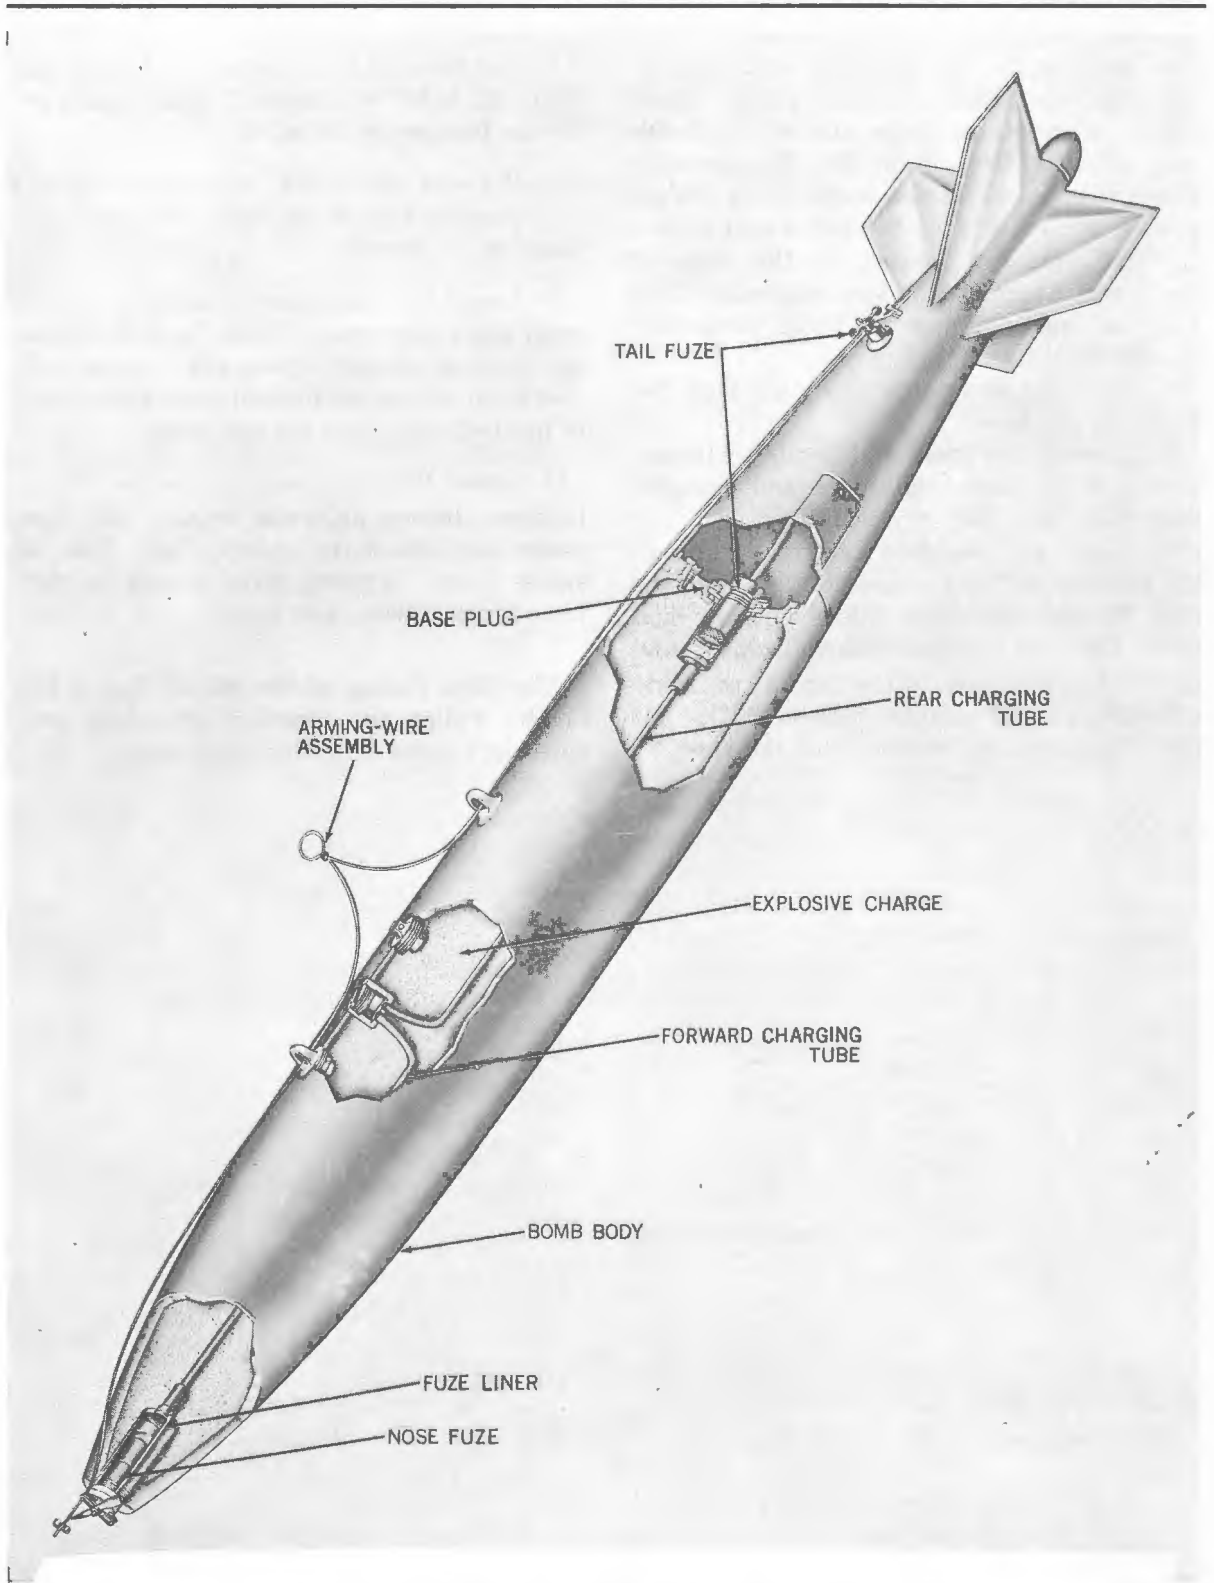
2000-lb Low-Drag Bomb (GP) Mk 84 Mod 1 (Mechanically Fuzed), Cutaway View.
